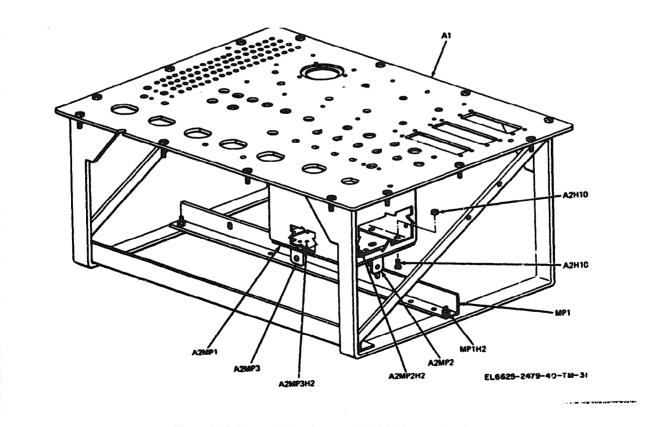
Pane and chassis assembly 1A3A8, parts location.
